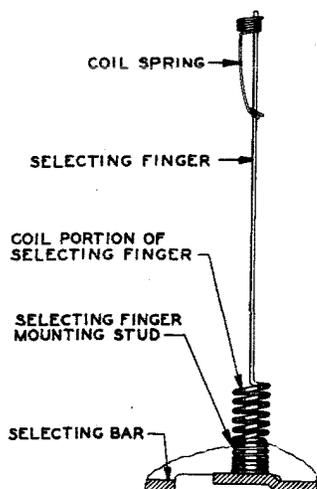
Method of Assembling Coil Spring of Selecting Finger
